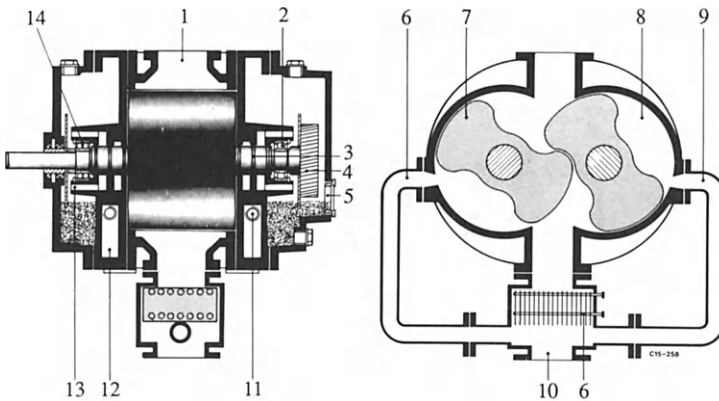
Roots vacuum pump with integrated by-pass line. 1, by-pass line; 2, by-pass valve. In practice the pressure-relief valve and the by-pass line are integrated into the casting for the pump housing
